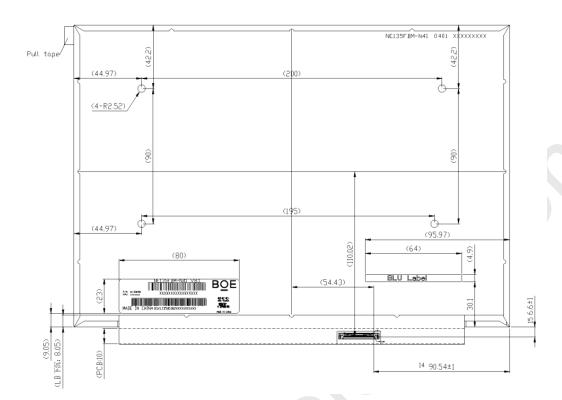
TFT-LCD Module Outline Dimensions (Rear view)
